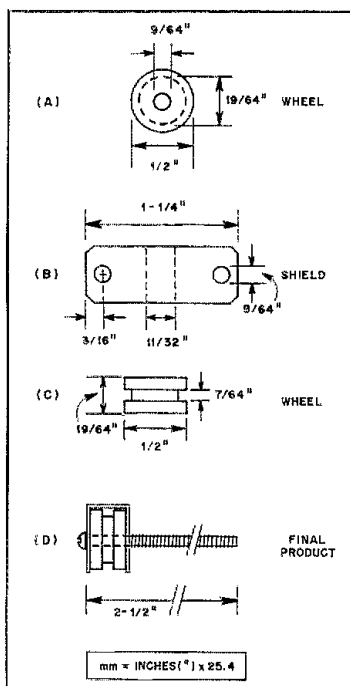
This diagram illustrates the steps in fabricating pulley wheels for use as quad-antenna wire-to-spreader connectors.
